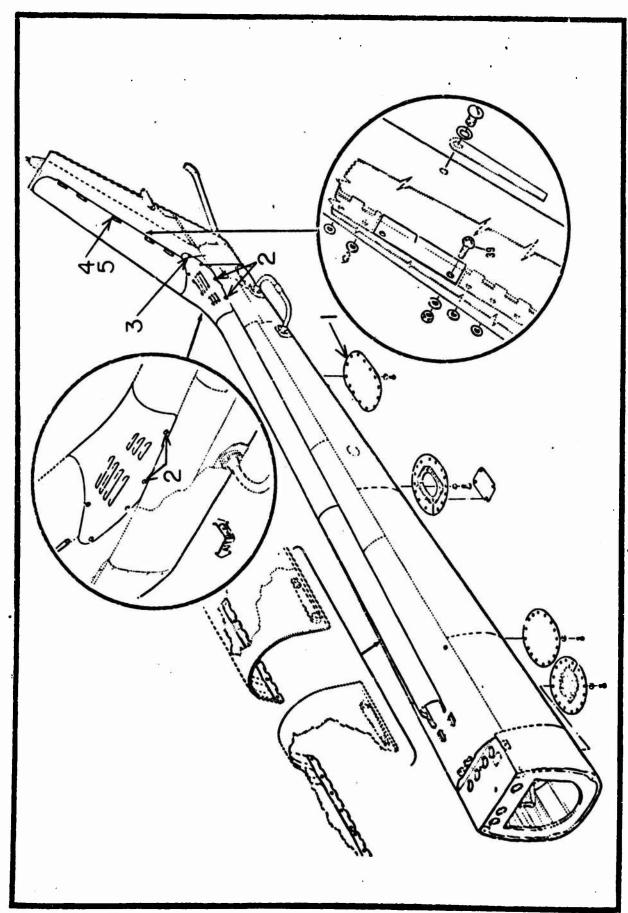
Door Installation, Access, Tail, Rotor Shaft
